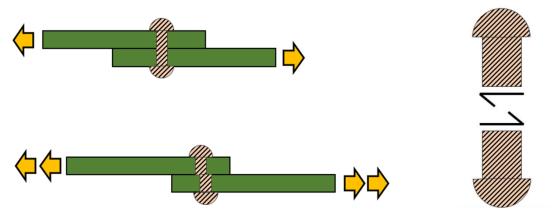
(From top right) (a)- Two plates fastened by a rivet; (b)- Shear stress due to breakage of rivet due to pulling in the opposite directions; (c)- a broken rivet
